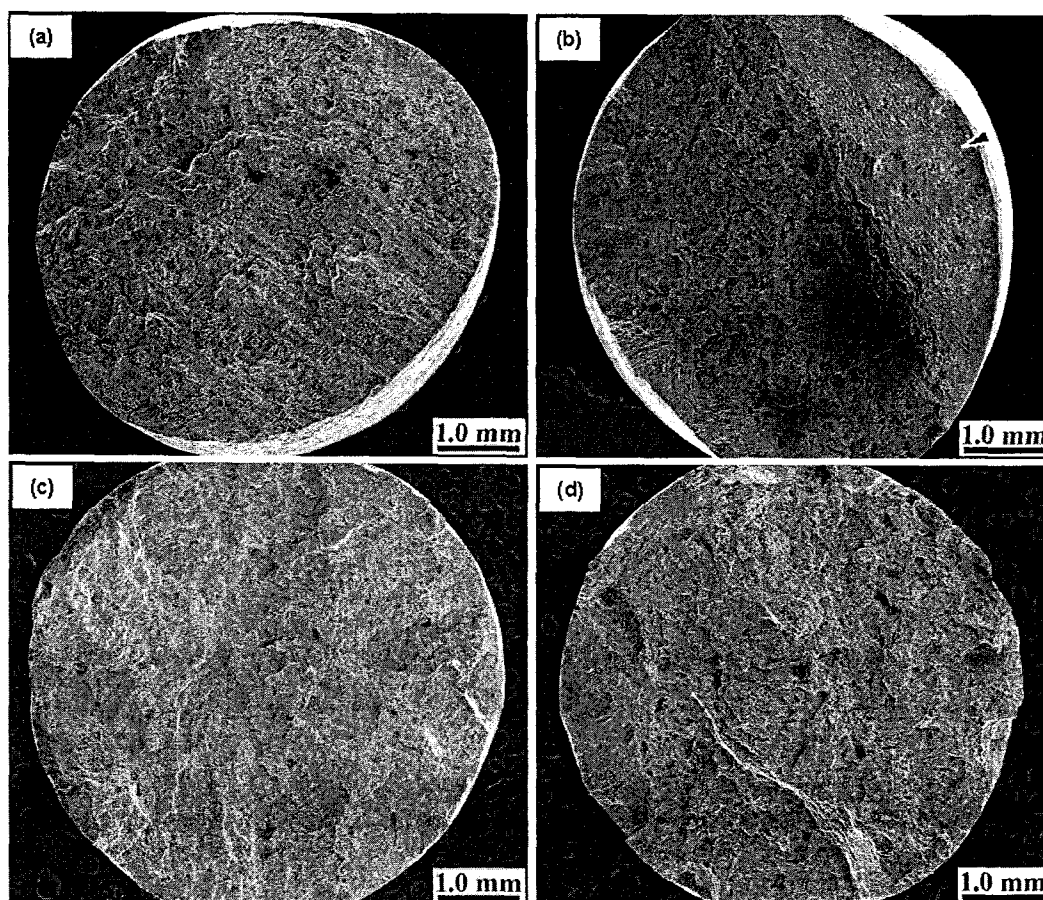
Tensile fracture surfaces of CM247LC alloy tested at 760°C.
